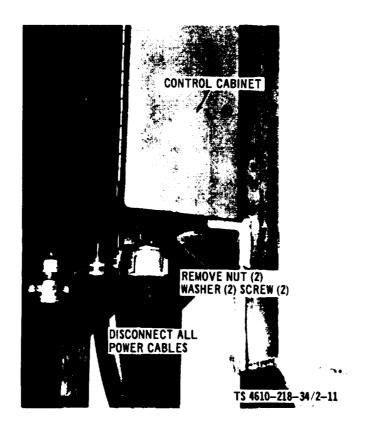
Electrical Control Cabinet, Removal and Installation
